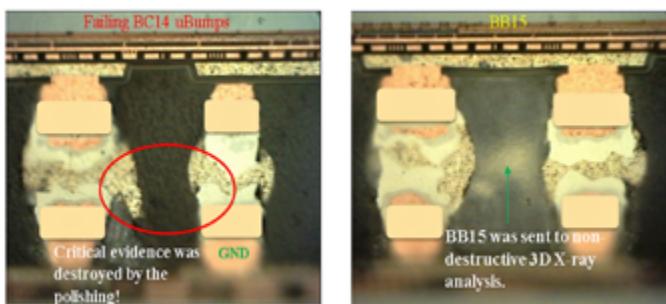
The second polish destroyed the physical evidence of a micro-bump short on pin BC14. Nondestructive 3D XRM tomographic imaging was performed on adjacent bump BB15 due to evidence of solder extrusion in the cross section's optical image.
